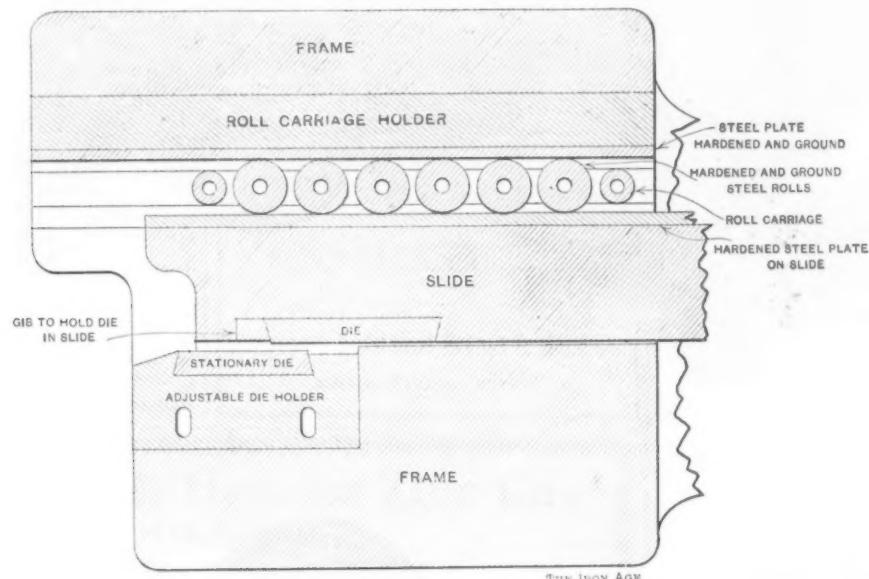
Section Showing Roller Bearing for Movable Die.
